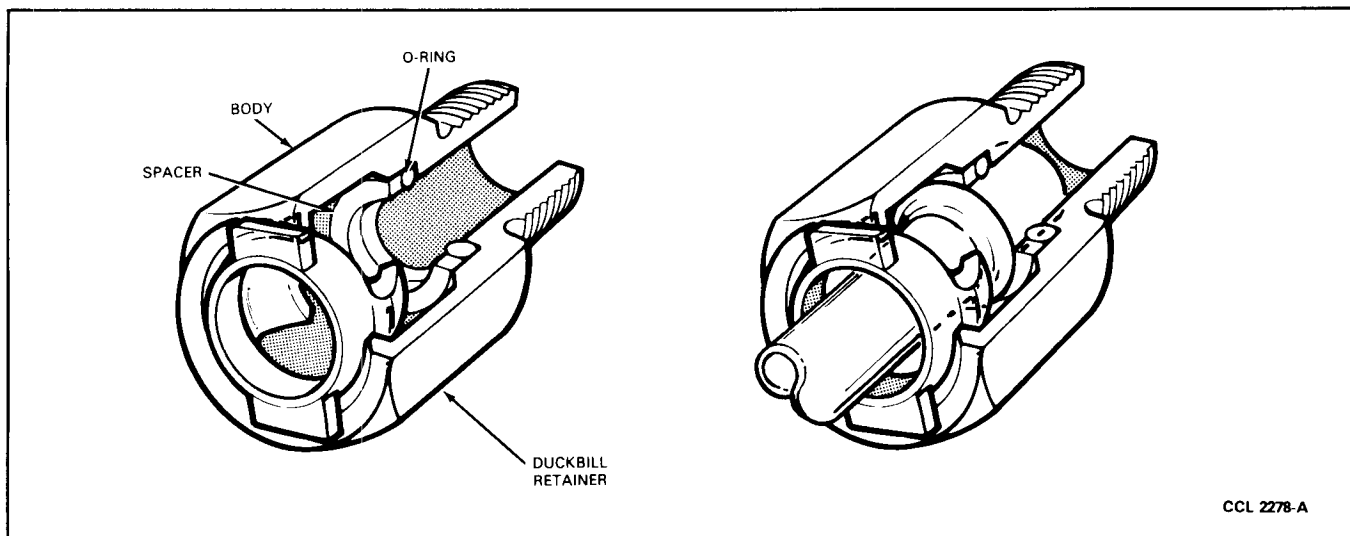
Oil Cooler Line Quick Connect Coupling—Sectional Views
